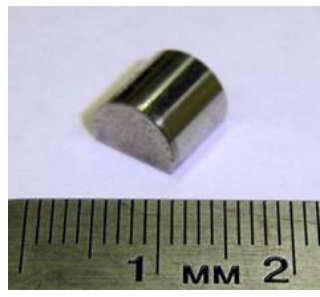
52100 Steel pin test specimen machined from an actual wrist pin
